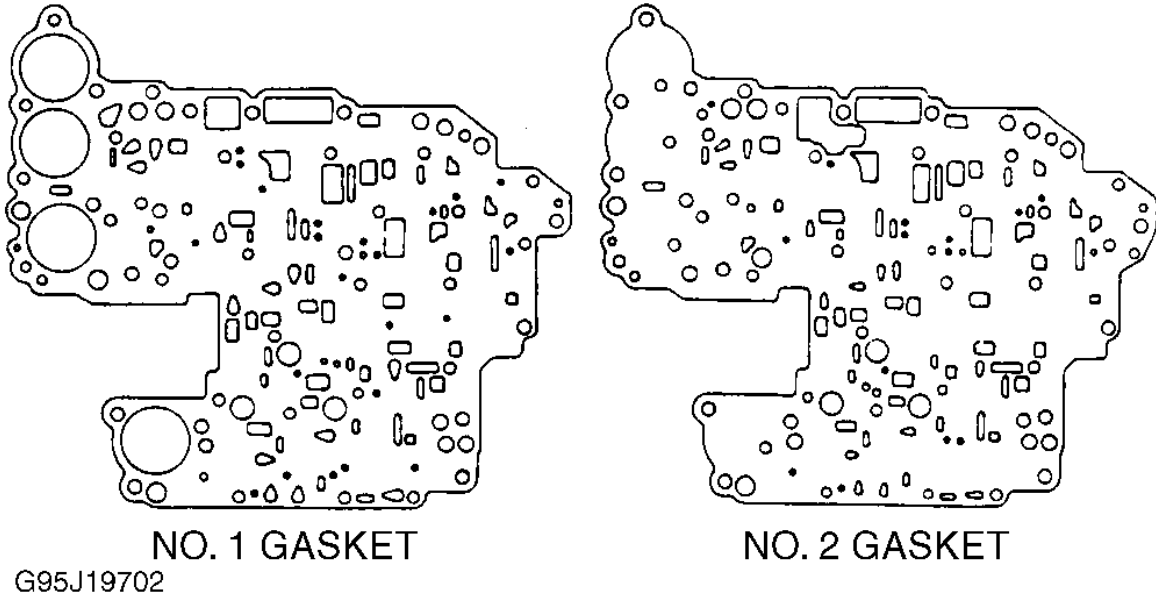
Identifying A-245E & A-246E Valve Body Gaskets
